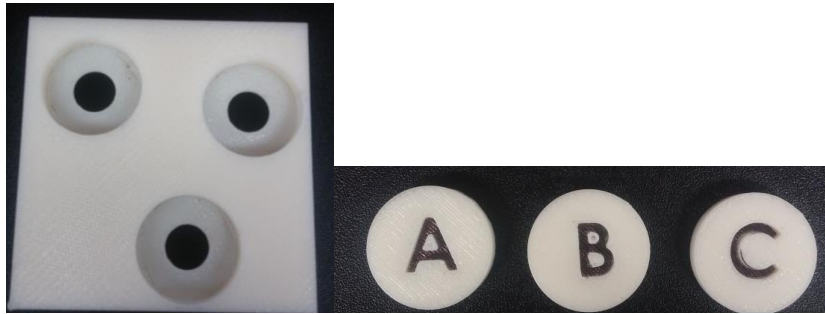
Circular Assembly Base without Components (Left). Circular Components (Right)
